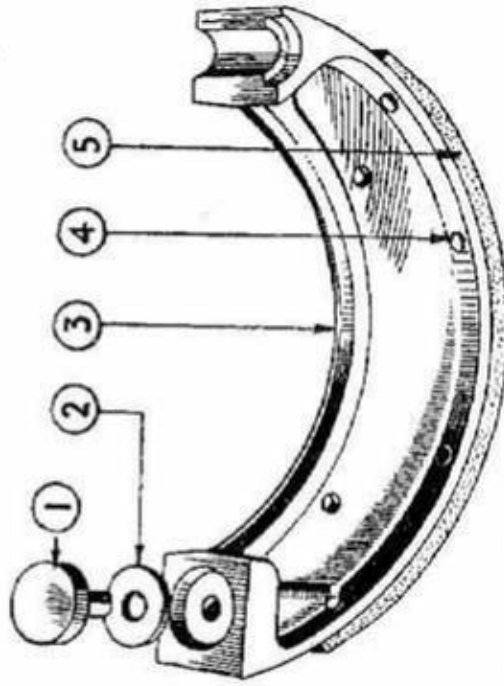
SHOWING 1948-9 BRAKE SHOE WITH THRUST PIN ADJUSTMENT
